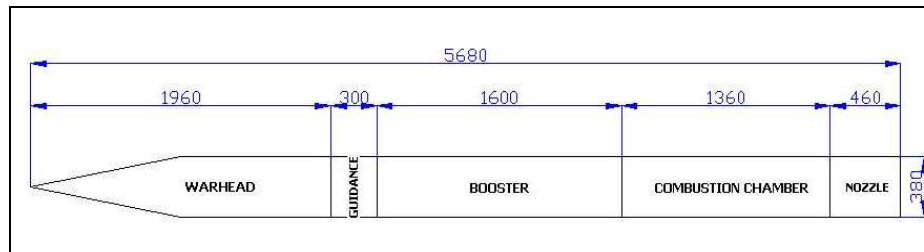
Side view drawing of the missile body (dimensions in mm)
